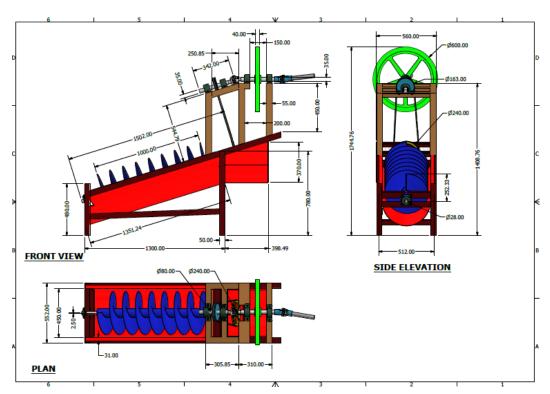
Isometric view of Screw Shaft Flywheel Stabilizing Hydro Turbine
